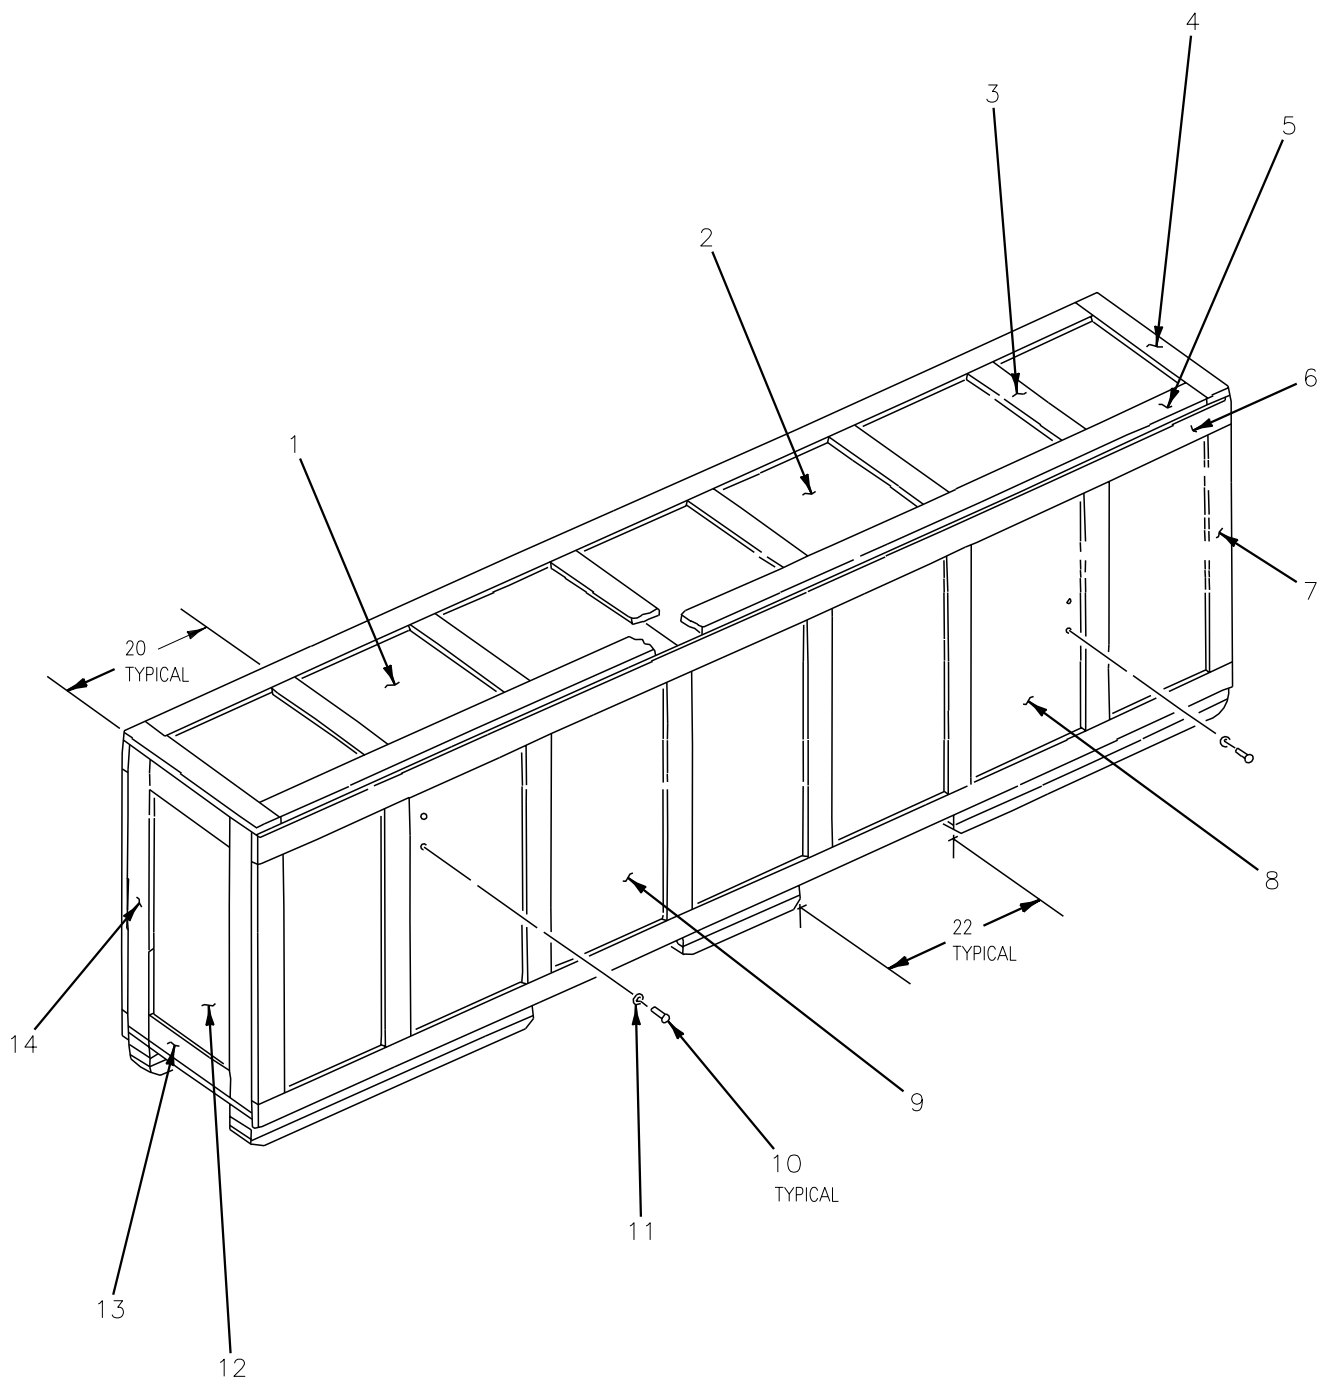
Inboard Leading Edge Flap Shipping Container (Sheet 1)
